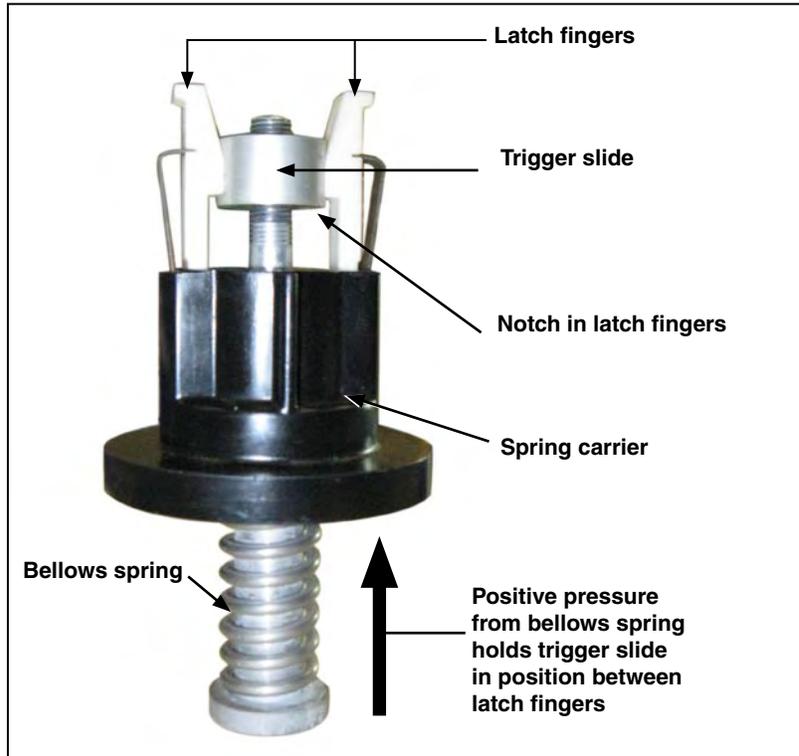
Interior of indicator assembly with red target indicator and target spring removed. Shows target under normal operating gas-pressure.
